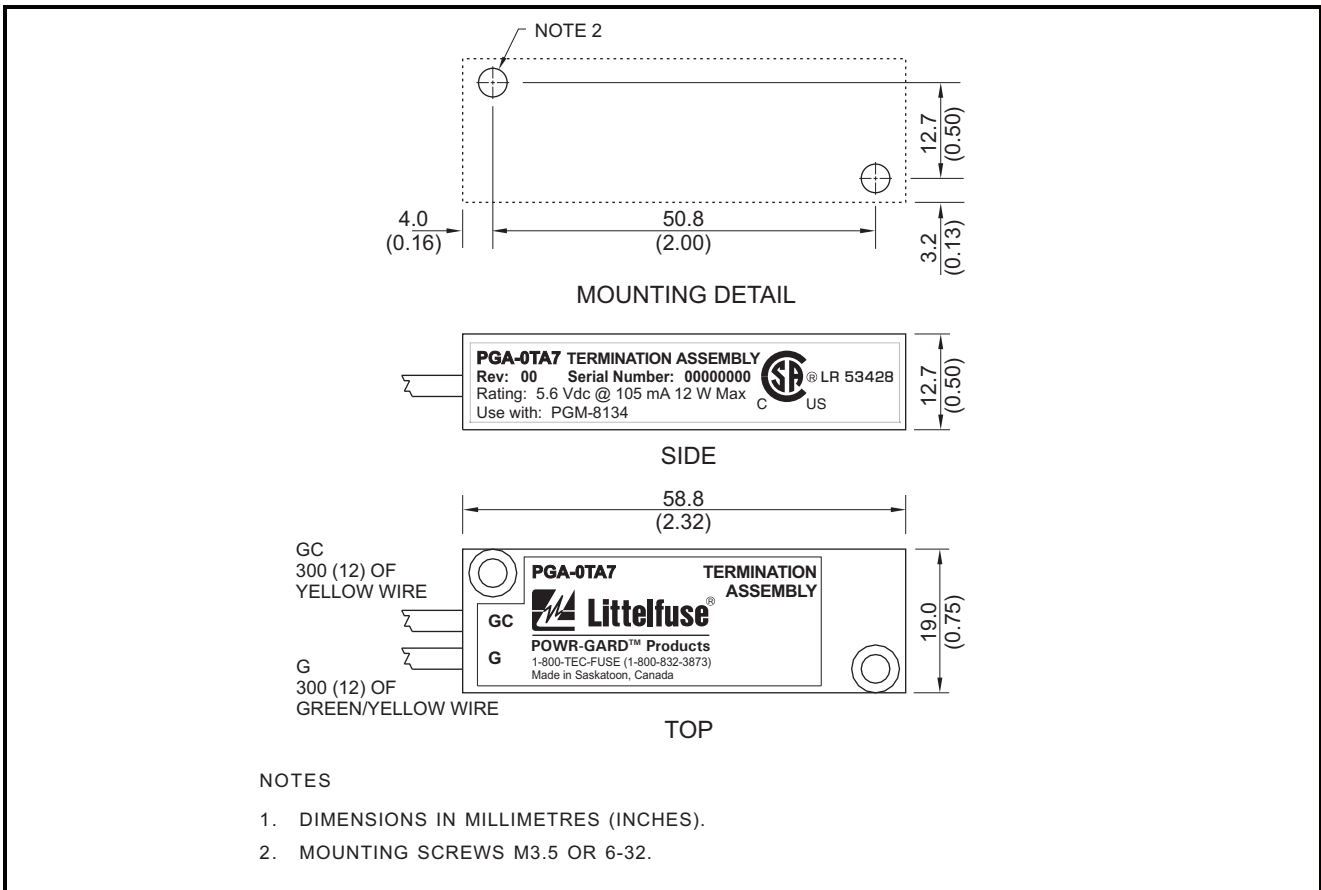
PGA-0TA7 Small-Format Termination Assembly.
